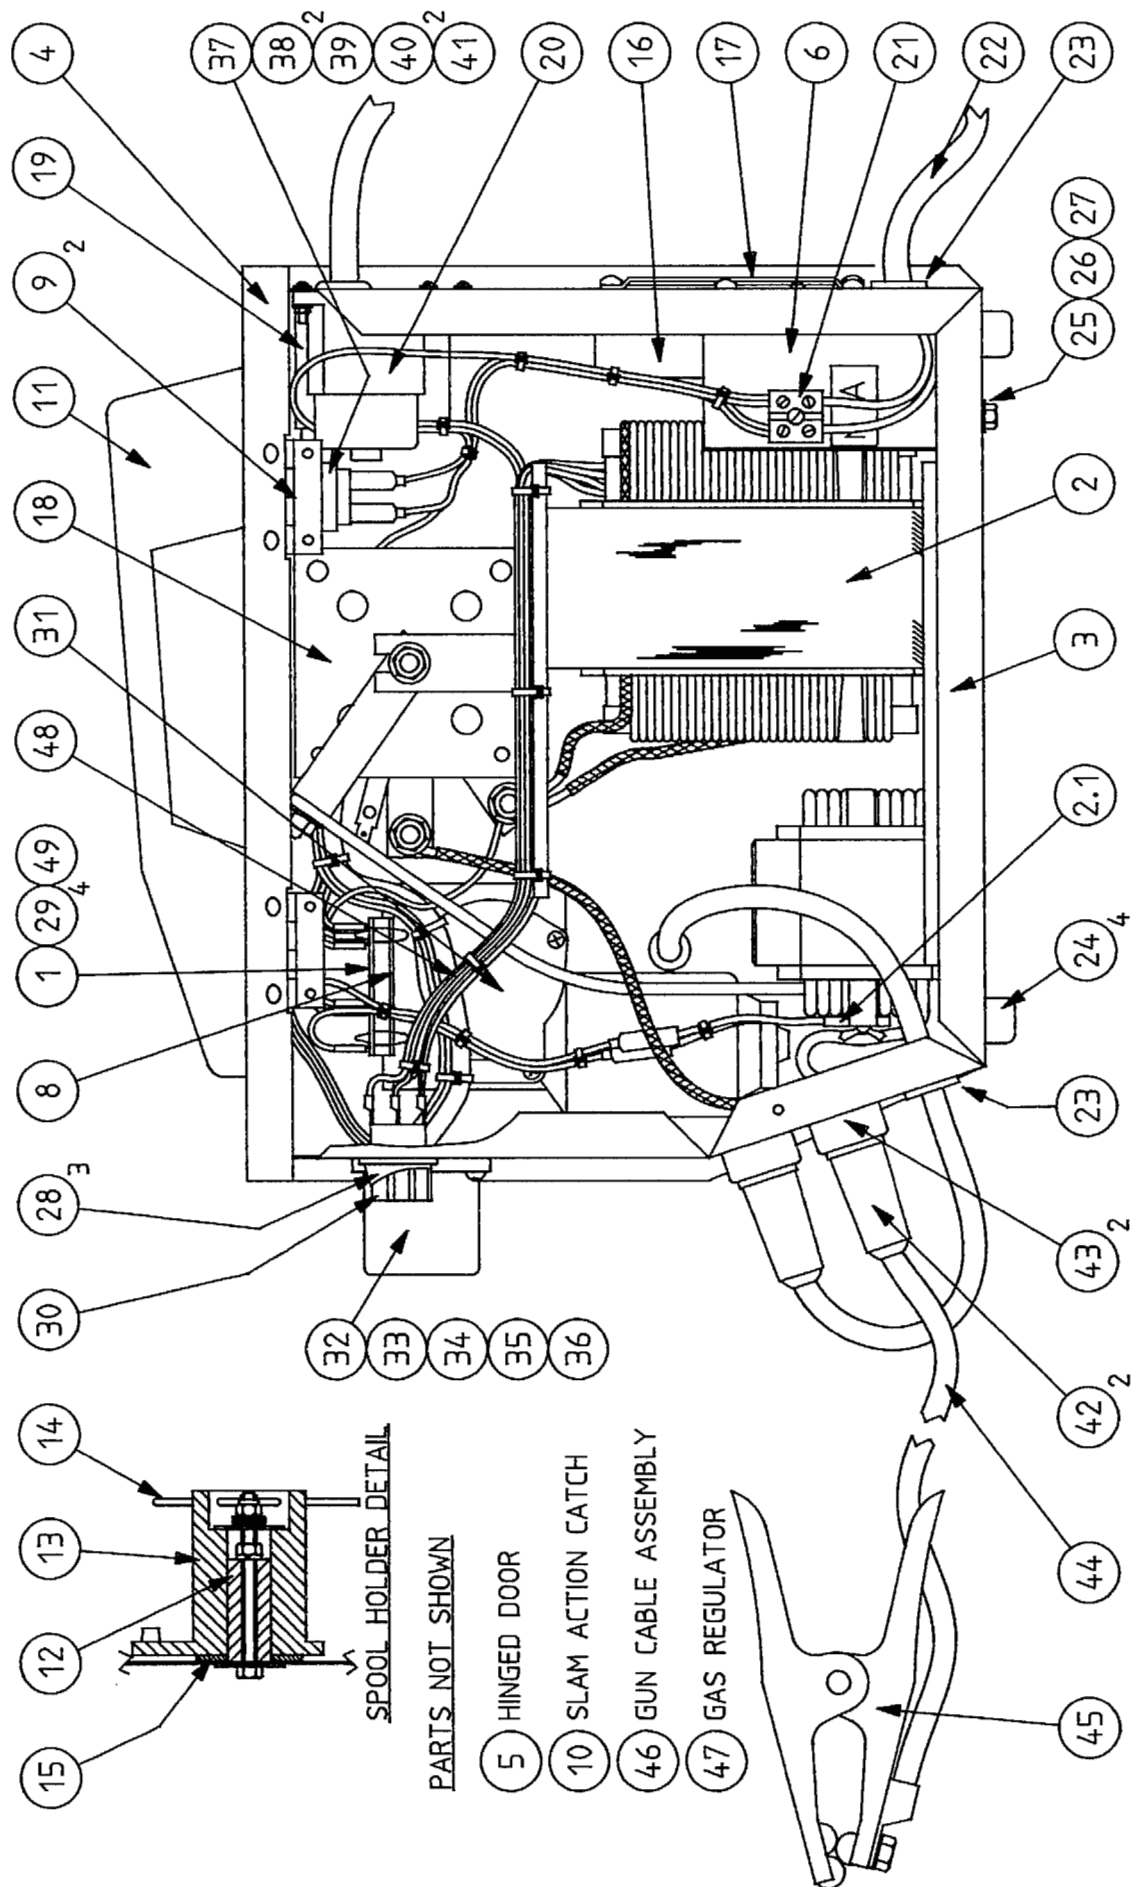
WELDMATIC 150S POWER SOURCE ASSEMBLY
